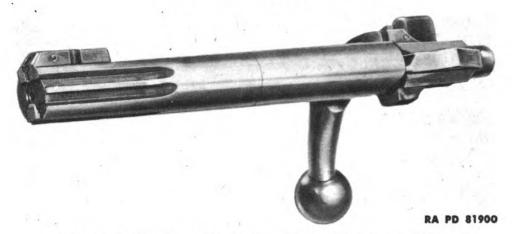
Bolt With Firing Mechanism Assembly of U.S. Rifle, Cal. .22, M1
